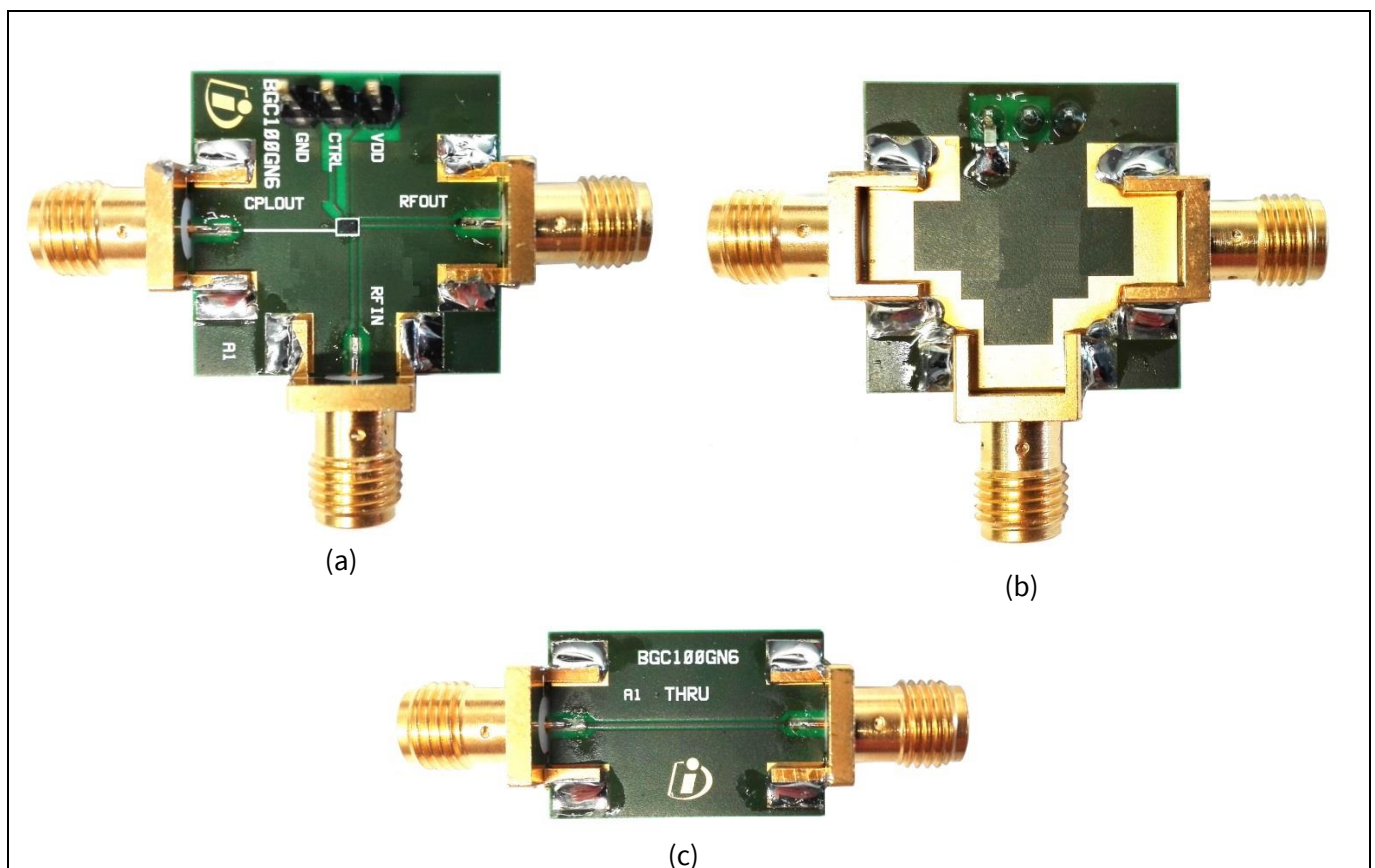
Assembled application board photograph, (a) – top side, (b) – bottom side, (c) – calibration THRU structure
